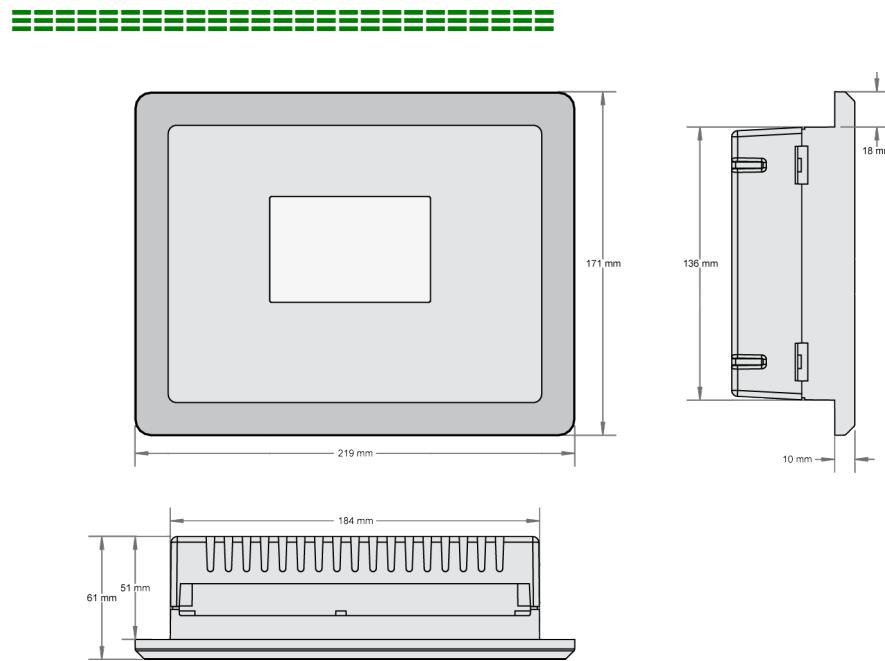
Plastic housing easYgen-2200 – dimensions
